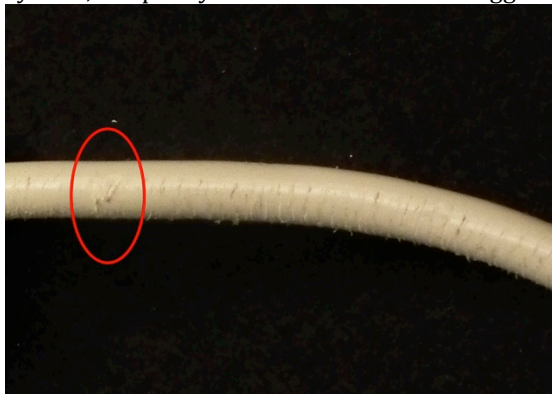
Damaged USB cable from cable pulling. The modified steel gear caused damage to the cable; the damage was a result of multiple runs through the module. The cable leaving the pulley because of poor guiding caused the damage in the red circle.
